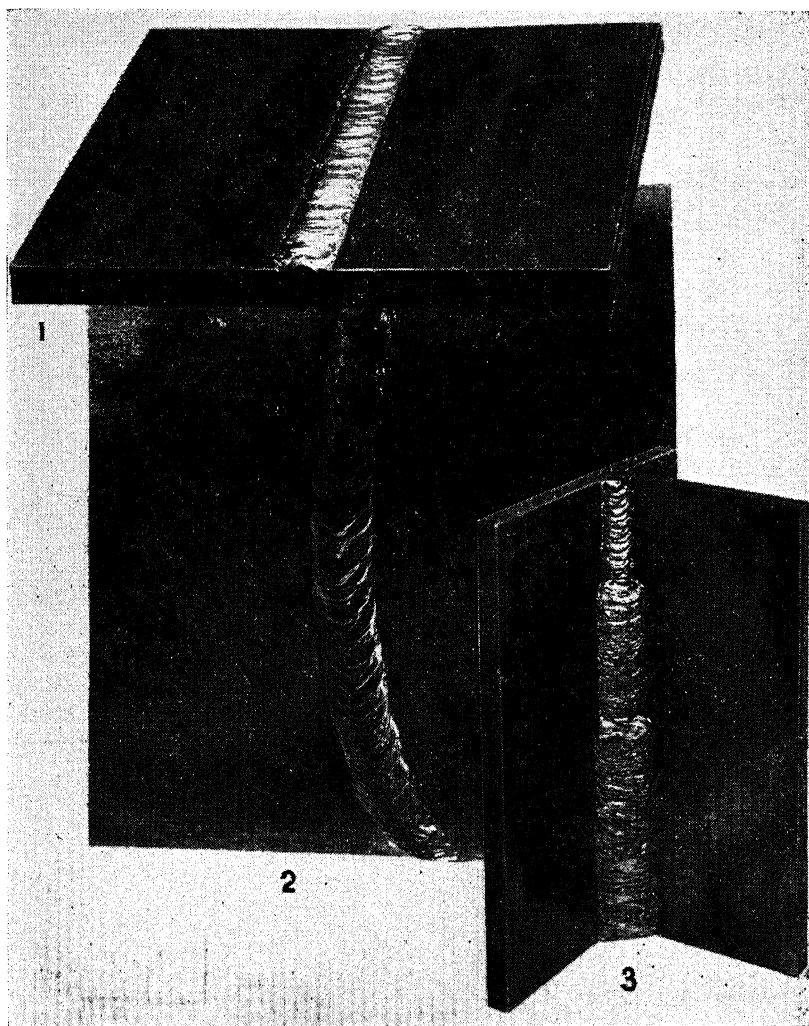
A. Welds produced with Type A Electrode. (1) Downhand weld in square groove butt joint in $\frac{1}{4}$ in. plate. (2) Three position weld in 6-in. pipe with V-groove joint. (3) Vertical fillet weld in $\frac{3}{8}$ -in. plate showing three passes.
